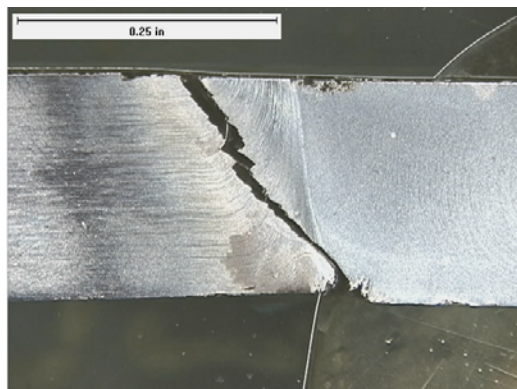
Effect of Weld Parameters and Post Weld Aging on Corrosion Resistance of FSW 2195-T8A3 after Alternate Immersion Testing
